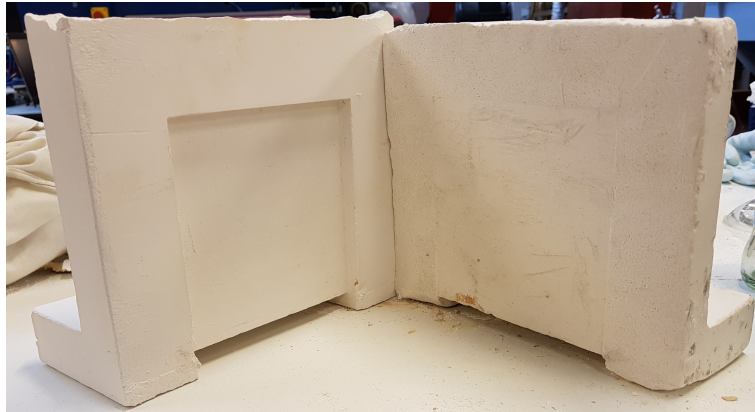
The two mould segments of the second mould. On one, there is a 10 mm indent for the glass web, the other is flat. There is space for the flange below.
